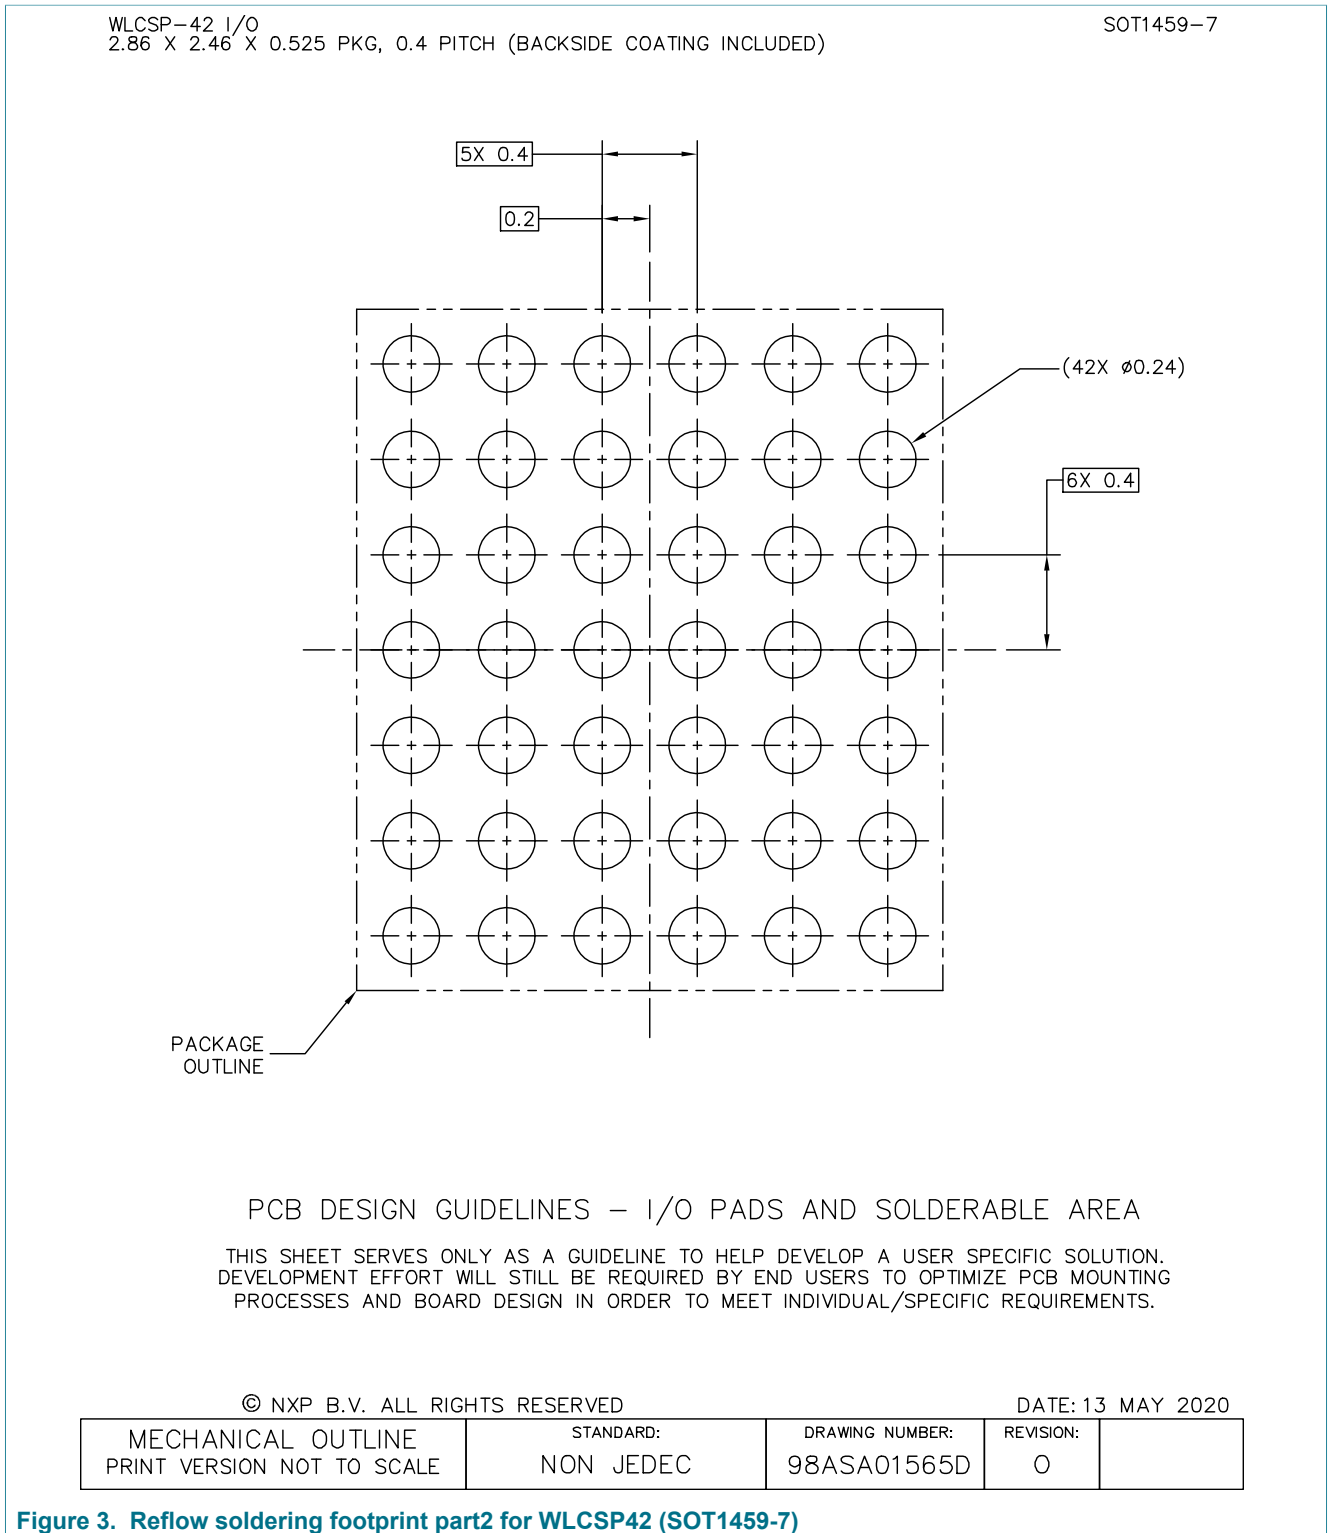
Reflow soldering footprint part2 for WLCSP42 (SOT1459-7)
